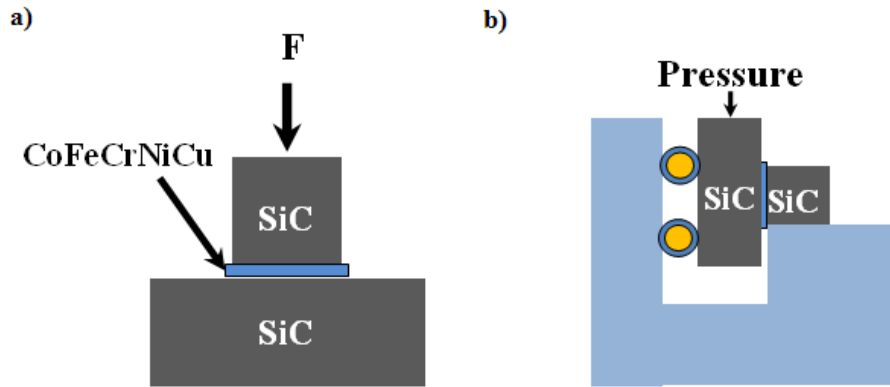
Schematic diagram of a) brazing assembly and b) shear test.
